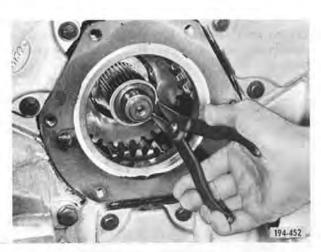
Removing Thrust Washer Retaining Snap Ring
